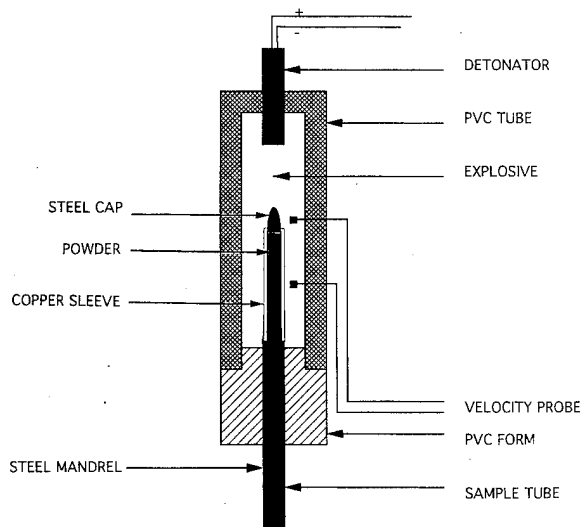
Explosive container assembly for explosive compaction of NdFeB powders.
